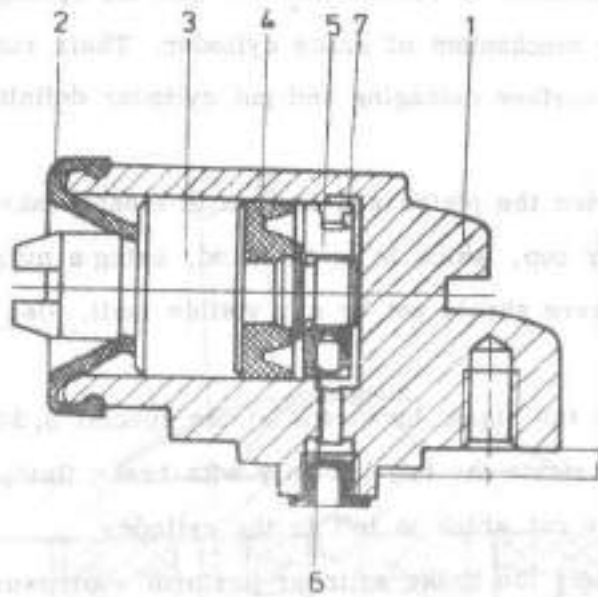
44. FRONT WHEEL BRAKE CYLINDER.
